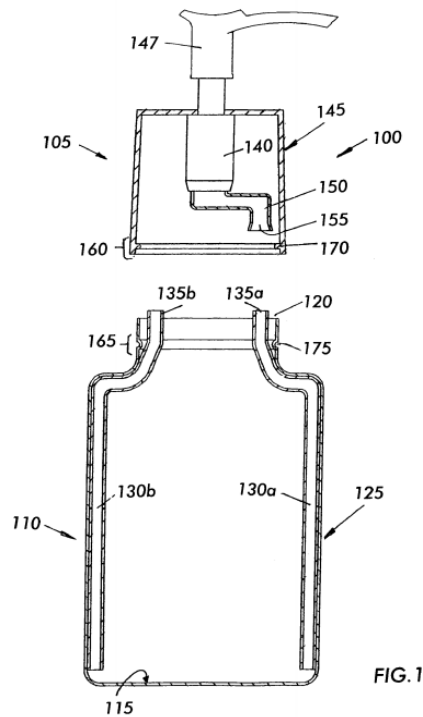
depicts a cross-sectional view of an exemplary dispenser assembly 100. *Id.* at 2:30–31. Dispenser assembly 100 includes container 110, in which any number of passageways 130a, 130b may be mounted, and also includes pump cap 105, in which pump passageway 150 is provided. *Id.* at 2:50–51, 2:63–65, 3:10–14, 3:36–44.
